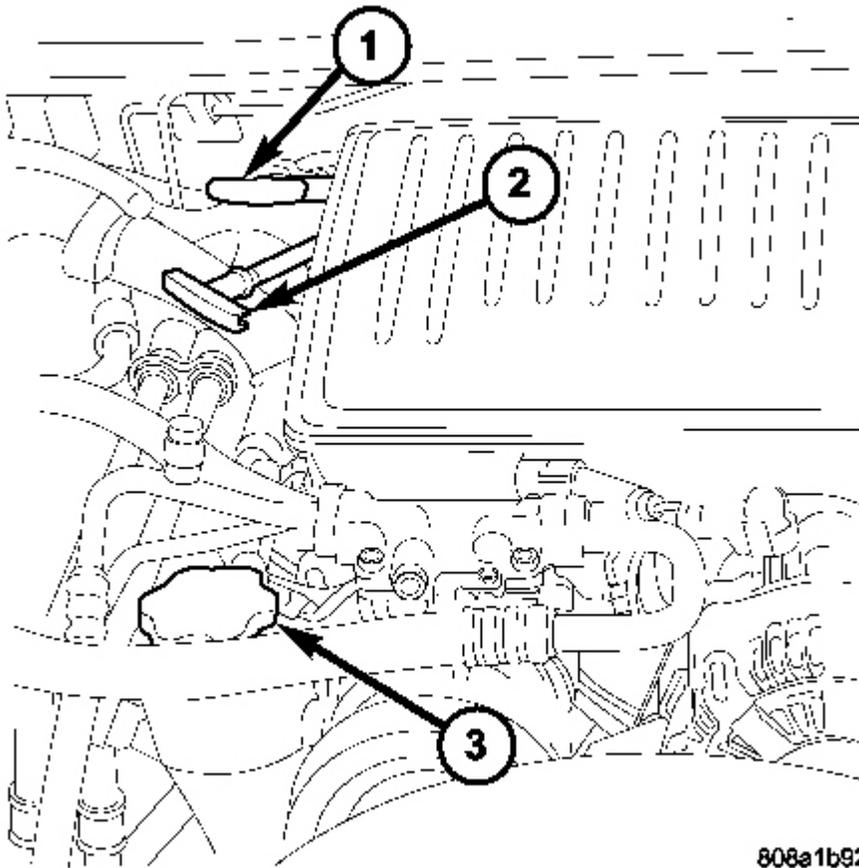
Identifying Engine Oil & Transmission Dipsticks & Engine Oil Fill Cap
